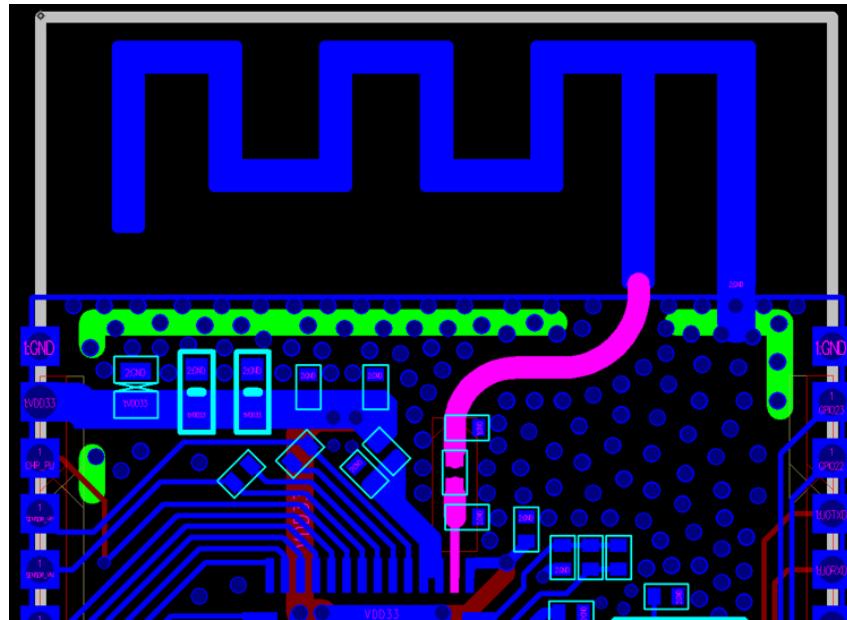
ESP32 RF Layout in a Two-layer PCB Design
